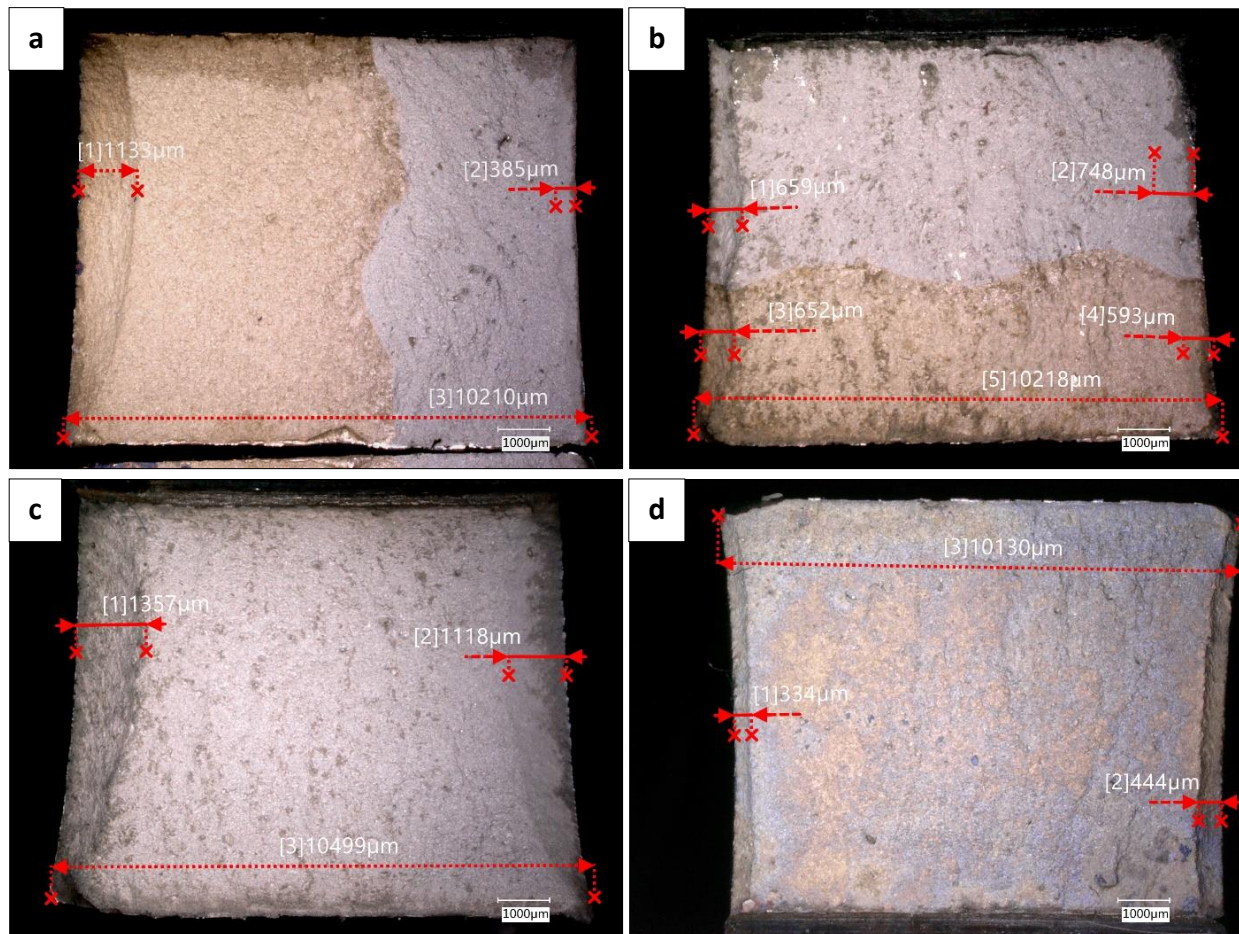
Fracture surfaces under the optical microscope for the following cases: (a) horizontal specimen 1, with the notch facing sideways, (b) horizontal specimen 1, with the notch facing top, (c) horizontal specimen 4, with the notch facing top, (d) vertical specimen, tested at -60 °C.
